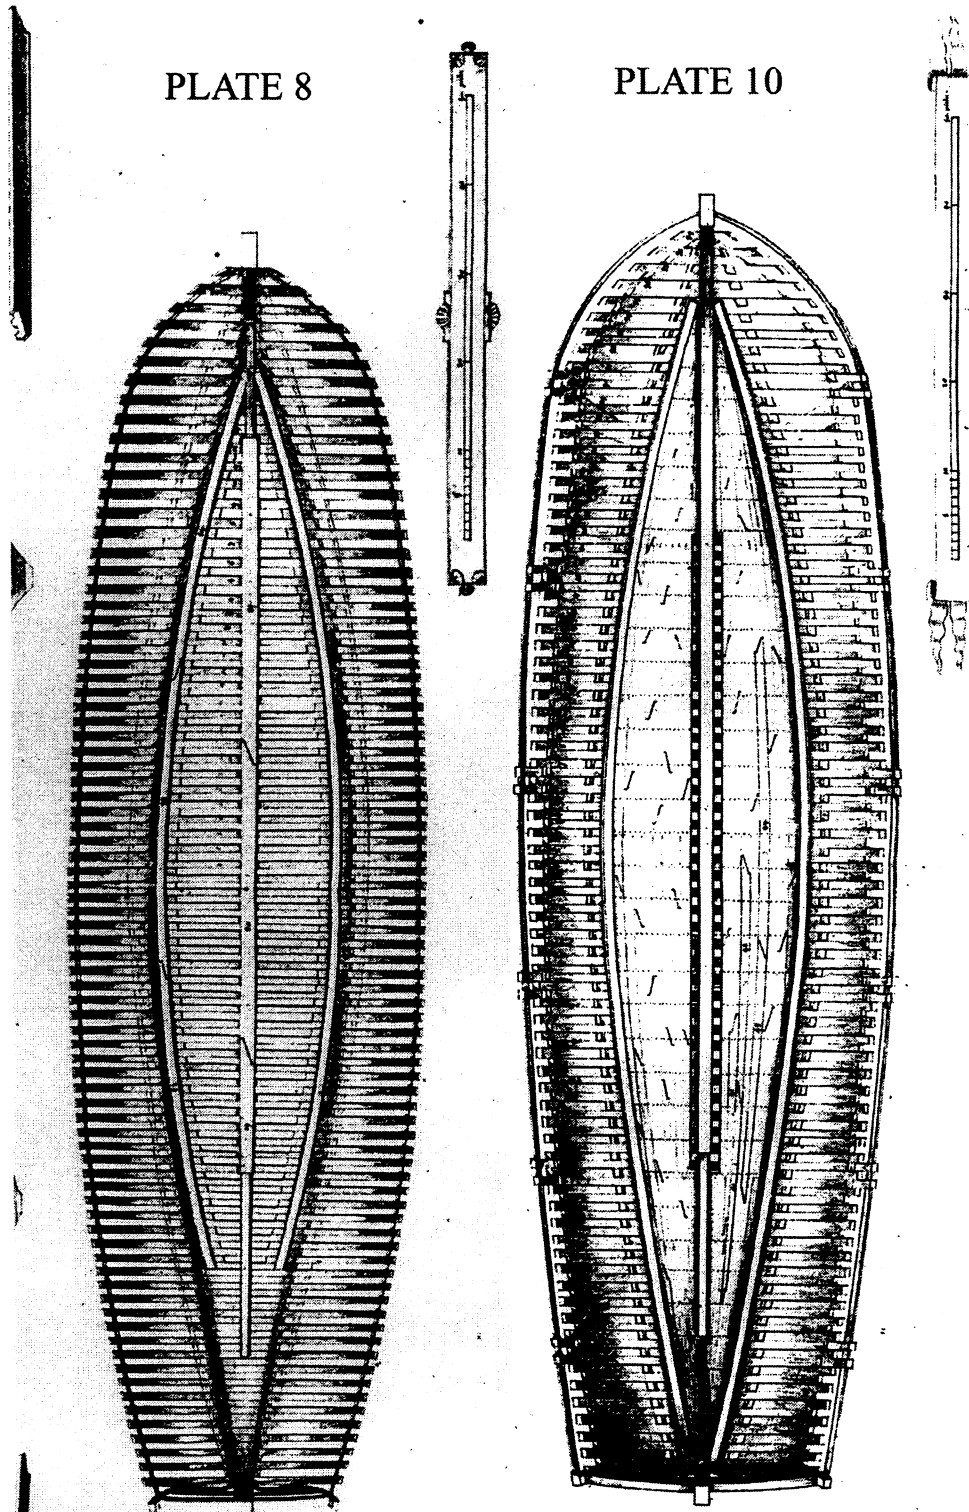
Two illustrations from the *Album de Colbert*. Plate 8 shows the outermost ceiling planks or stringers notched over the frames to provide a border for the rest of the ceiling. Plate 10 shows all the ceiling plank installed. (*Album de Colbert*, 1988)
